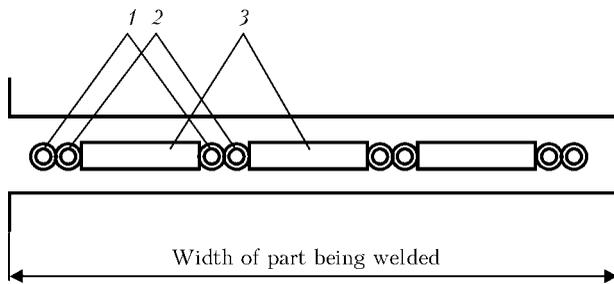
Scheme of consumable nozzles with channels for wire feeding (variant for one phase): 1, 2 – channels for movement of working and doubling welding wires, respectively; 3 – plates of consumable nozzle
